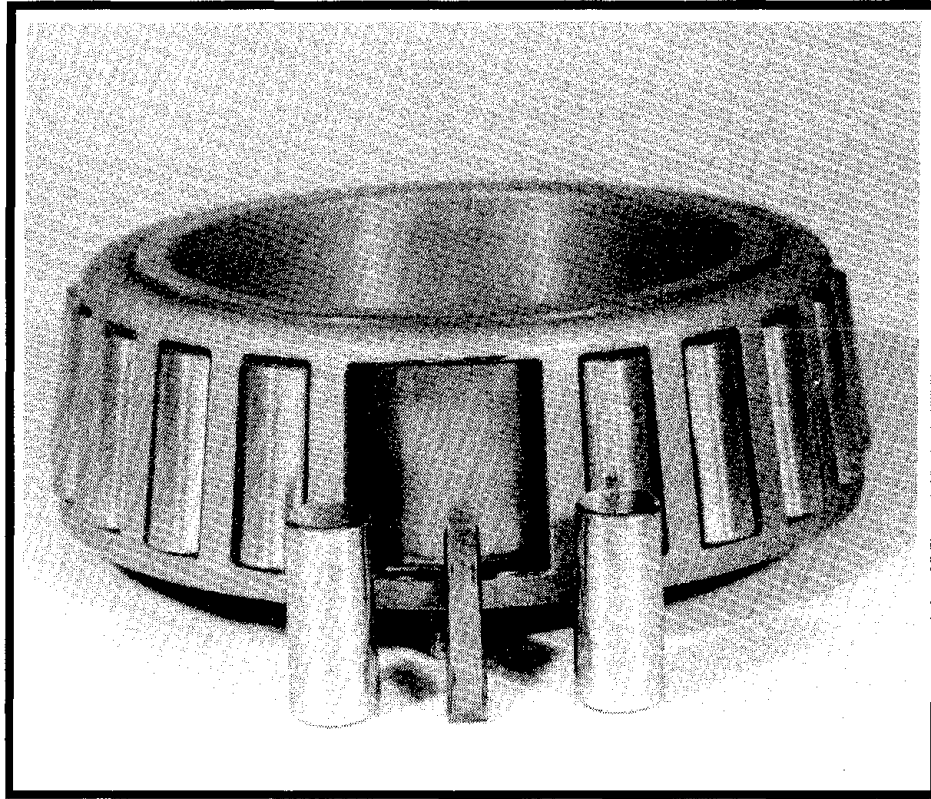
Pre-Test Condition of Inboard Cone -- Bearing B
